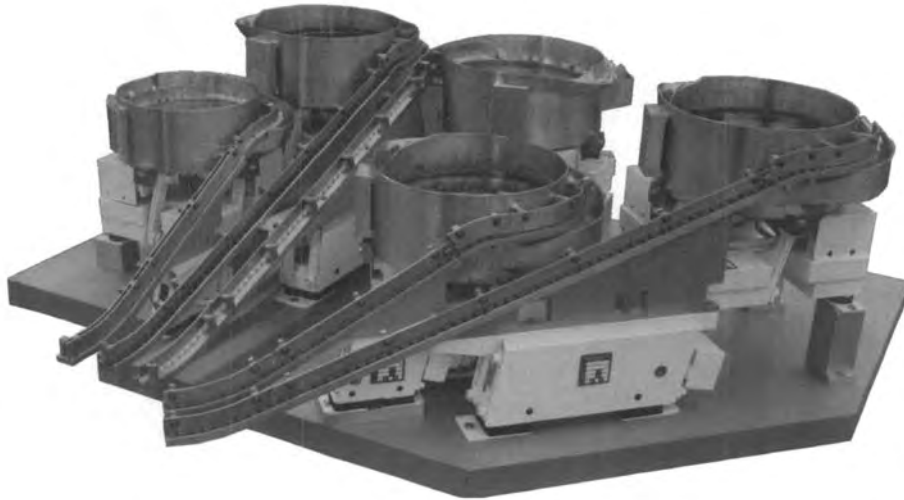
F3a Multiple vibratory parts feeders bring small parts to the assembly station and put them in a consistent orientation. They can then be quickly picked up with short motions by a human assembler or a robot, or a special purpose pick and place mechanism. (Photo courtesy Service Engineering, Inc., Greenfield, Indiana.)
